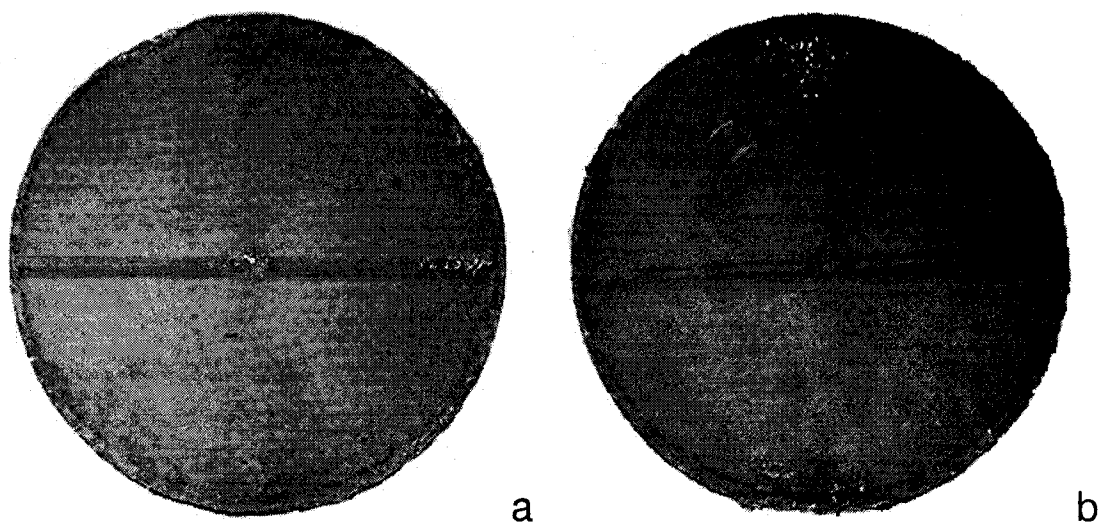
Photograph of disk 1K4R-HG molded with 4 layers of preform and 1 flow channel. Mold cavity surrounding preform filled with a ring of hot glue prior to filling.. a: top; b: bottom
